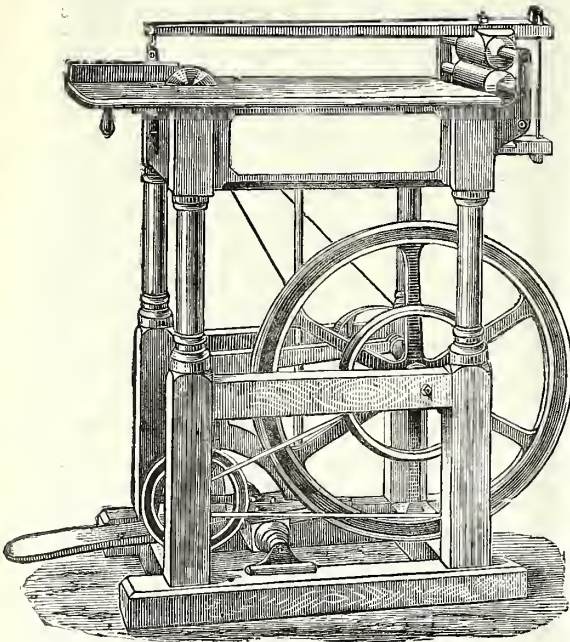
WILLIAMS'S AMERICAN SAWING MACHINE.
